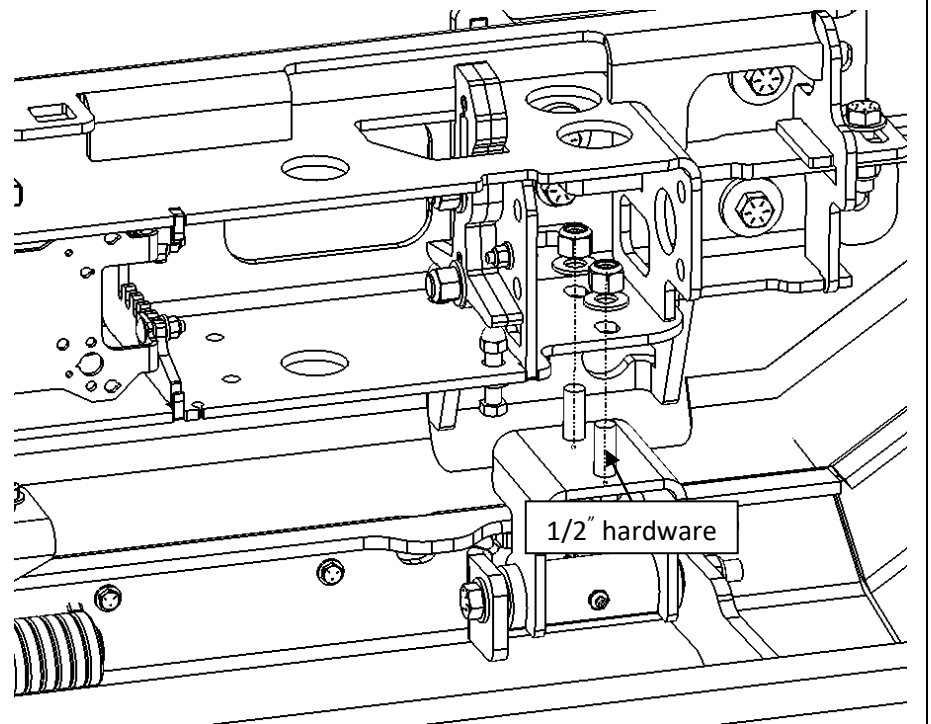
Bracket and Bumper Disassembly (Driver's Side Shown).
